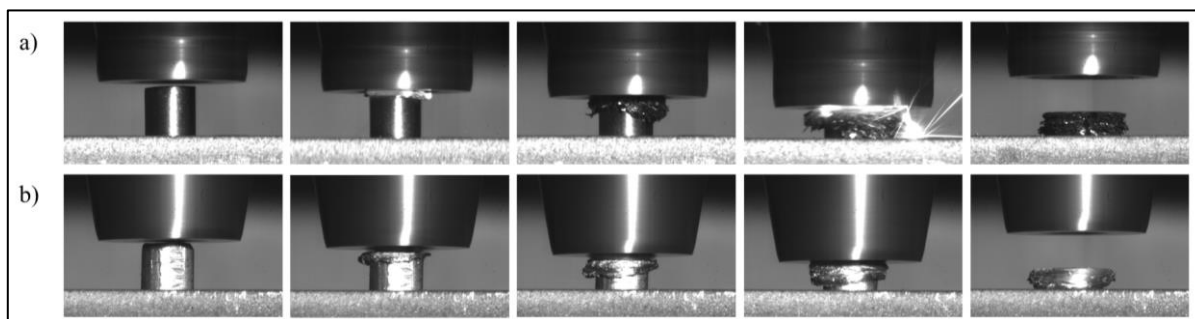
Head forming process on a) Ti6Al4V rivet and b) AA6060 rivet
